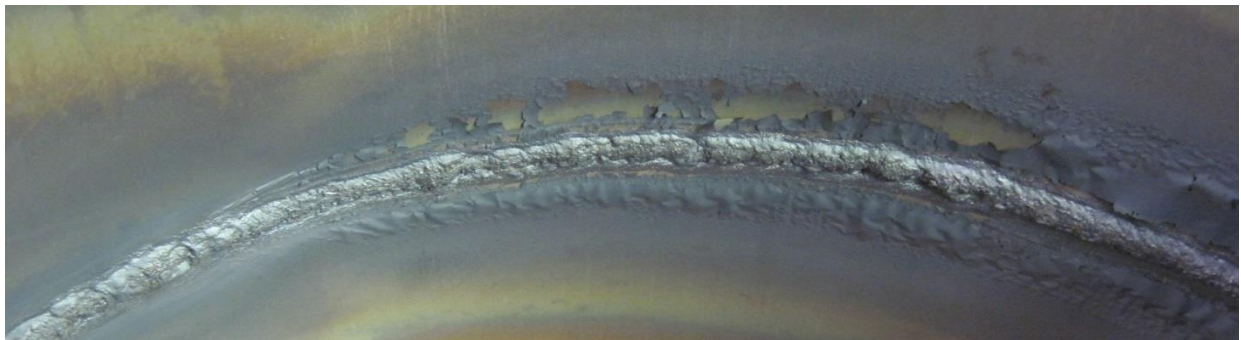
Weld without backing gas (pipe segment R). Very loosely adherent black layer can be seen at the HAZ. Weld surface is very rough.
